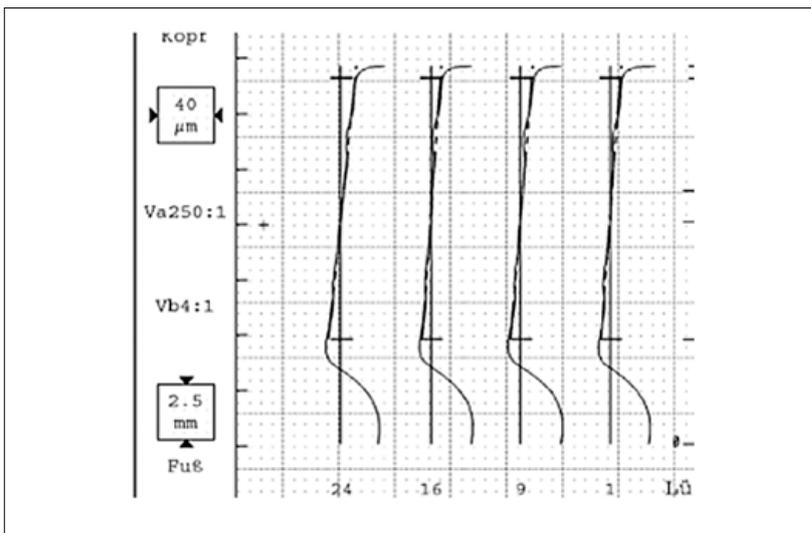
Tooth profile after rolling (DIN Q5) including protuberance for subsequent hardfinishing operation (Courtesy GKN)
